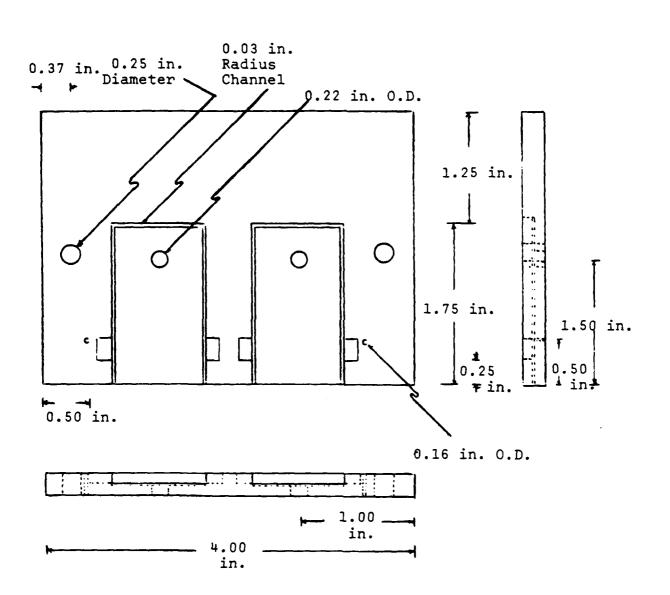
TOP HALF OF BONDING JIG FOR SINGLE LAP BONDS
